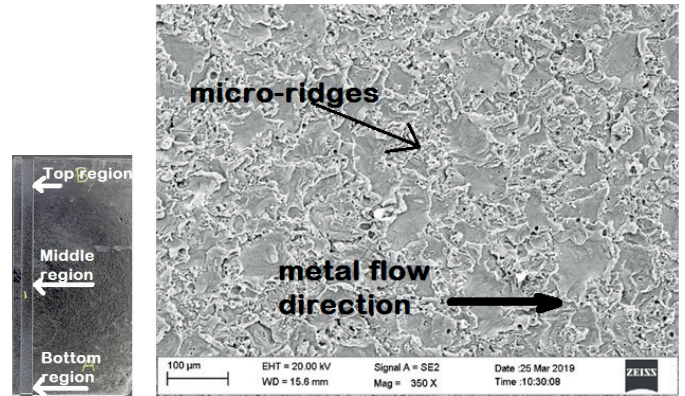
Picture of machine slot & Fig. 4 SEM image of machined surface
